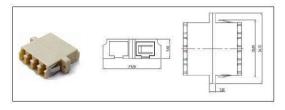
LC SC Footprint Quad Adaptor Appearance & Dimension
